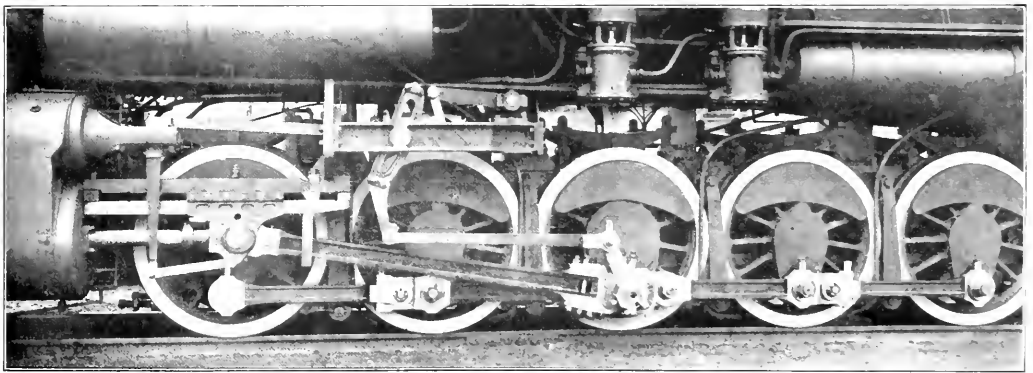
Running Gear of Chicago, Burlington & Quincy, 2-10-2 Type Locomotive
